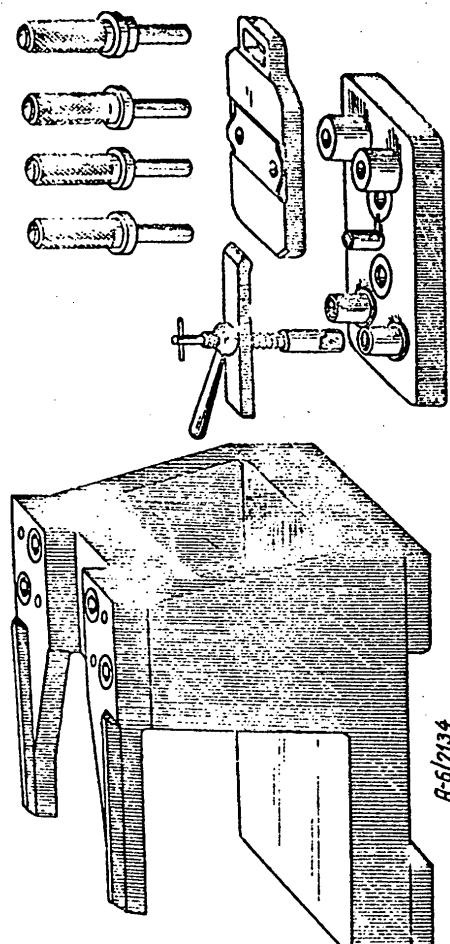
FIXTURE FOR CHECKING ALIGNMENT OF PIN HOLES IN COUNTERWEIGHTS
